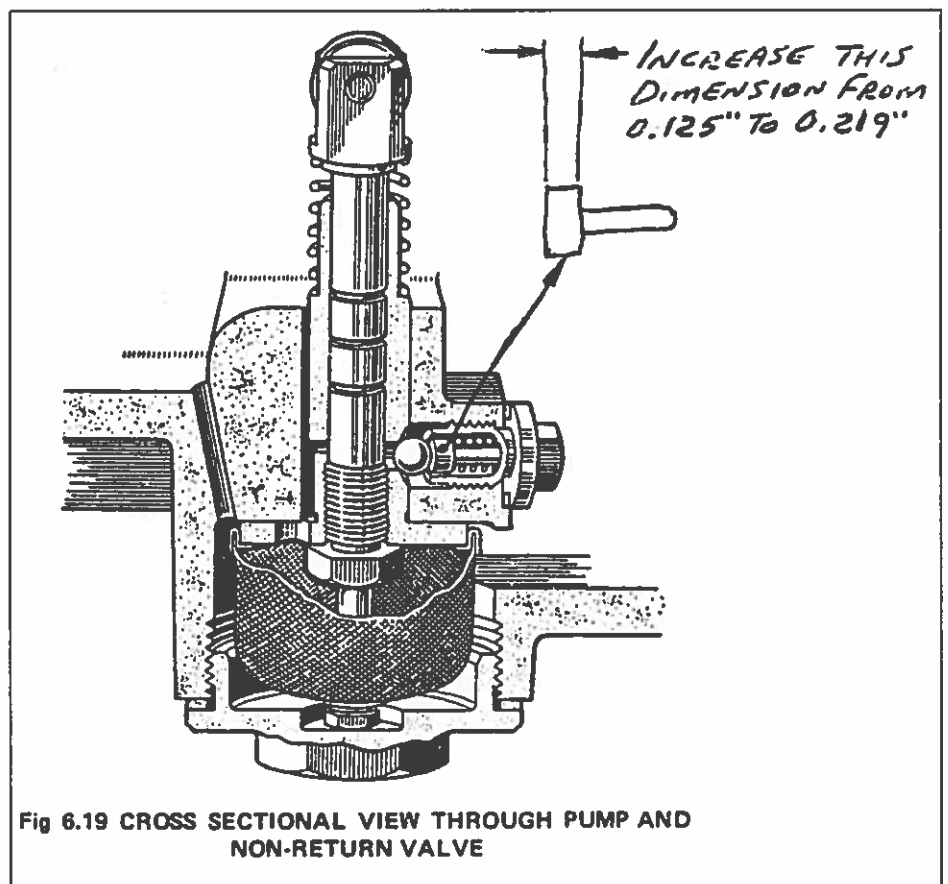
CROSS SECTIONAL VIEW THROUGH PUMP AND NON-RETURN VALVE
